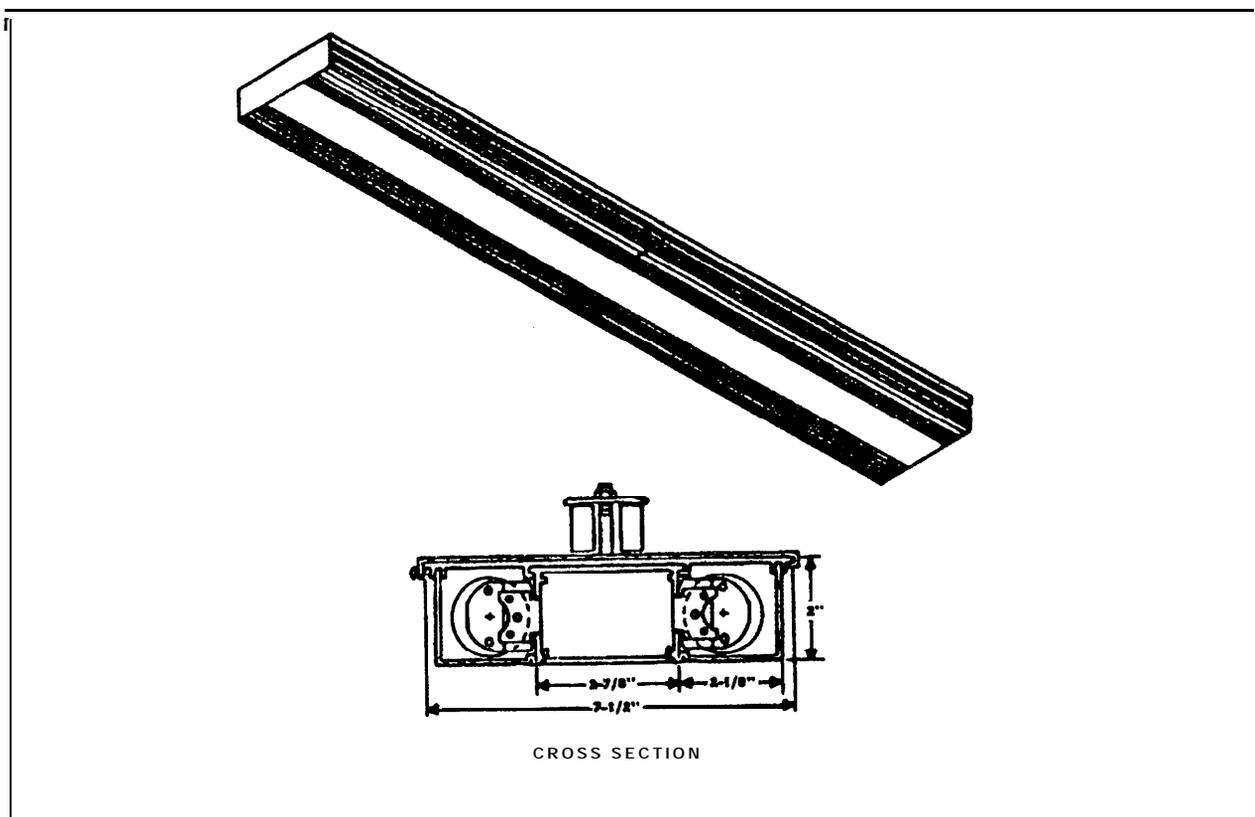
Typical SENTINEL Double-Sided Lighting Fixture
